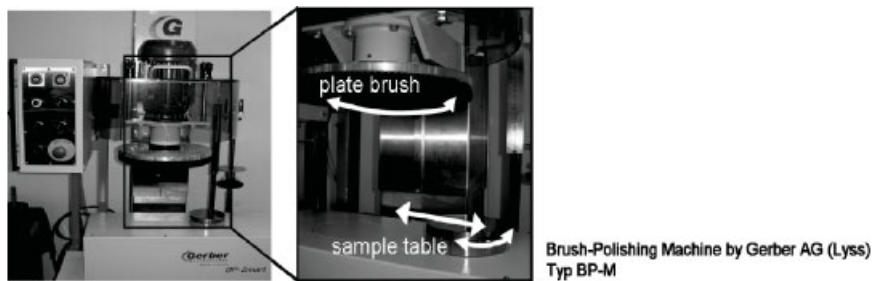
Brush-Polishing Machine by company Gerber AG (Lyss) for edge rounding off of cutting inserts
